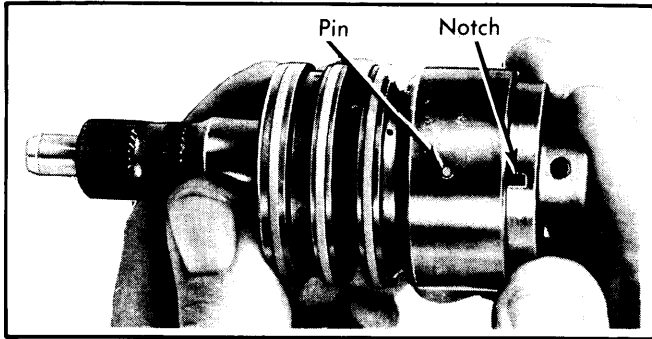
Aligning Pin and Notch for Input (Stub) Shaft
